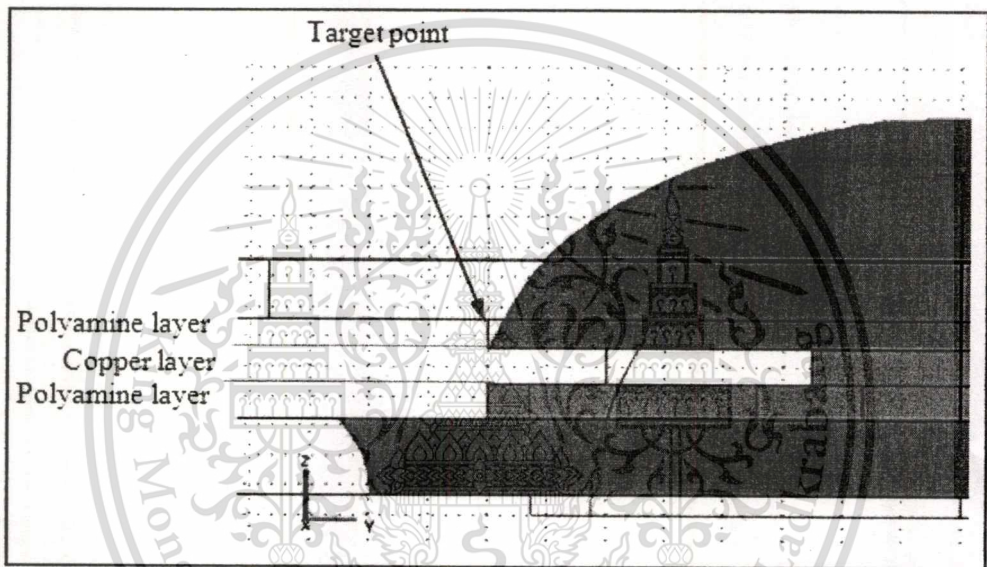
Show the perfect liquid t solder mass movement on HGA LT
